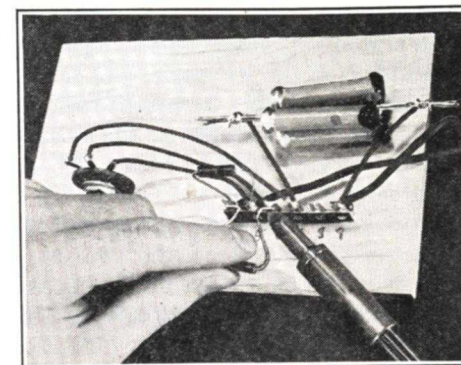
This illustration shows you how to make a temporary soldered lap joint for the purpose of connecting a radio part temporarily between two terminals. This technique allows you to hold the part with one hand (instead of holding the solder in that hand), and gives a joint which can easily be disconnected.
